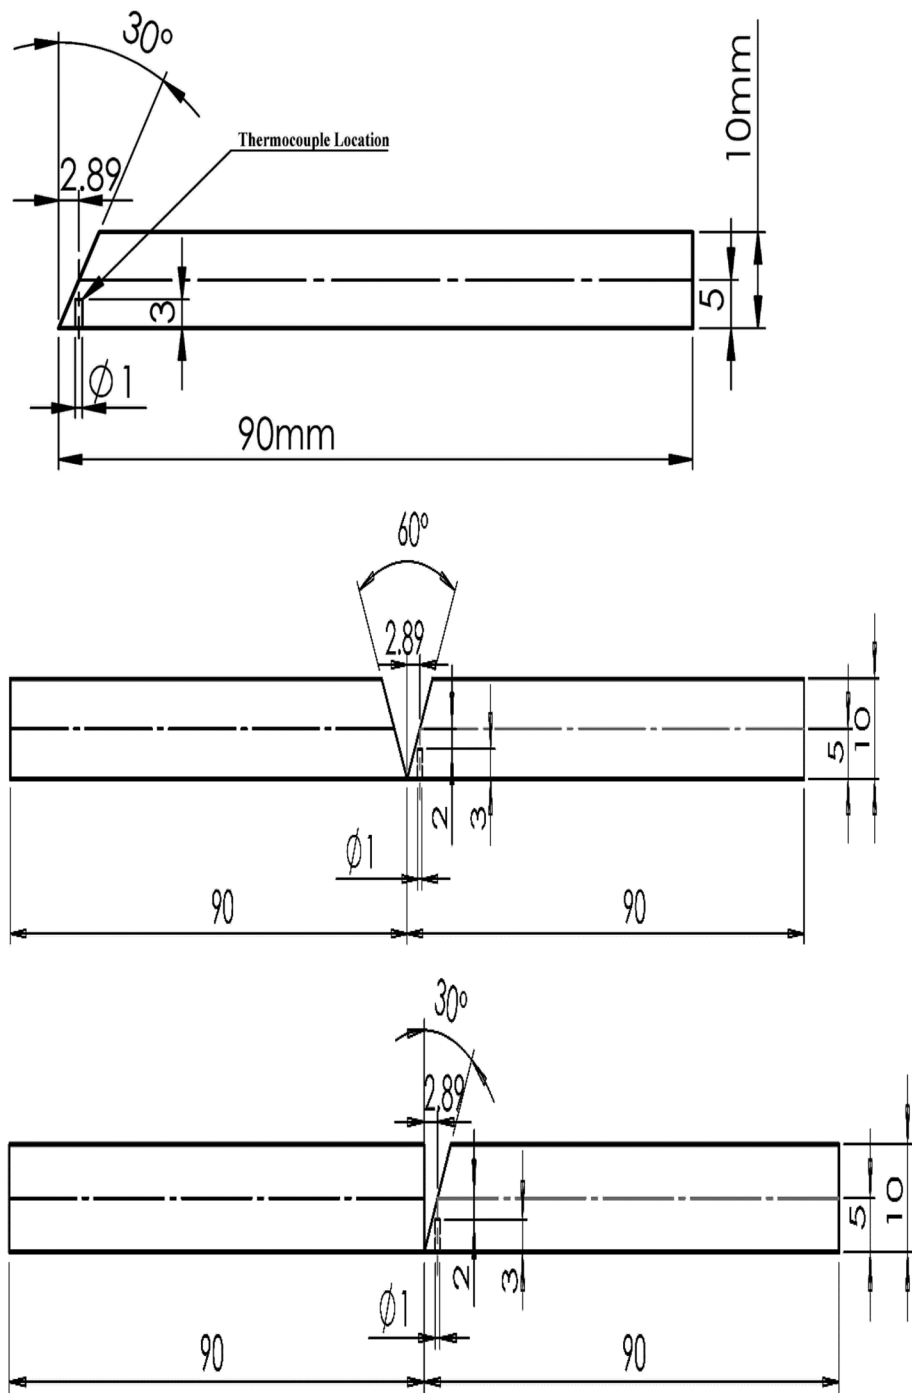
Schematic drawing of edge preparation showing thermocouple location
